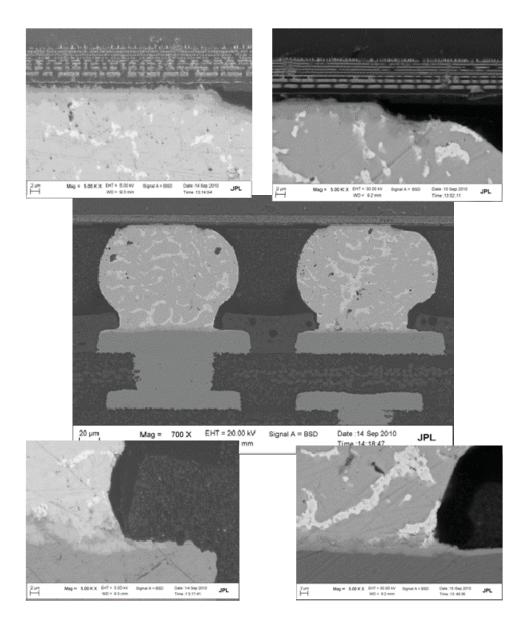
Cross-sectional photomicrographs of FCBGA1704 assembly after thermal cycling showing detailed metallurgical features of flip-chip solder balls at the die level.
